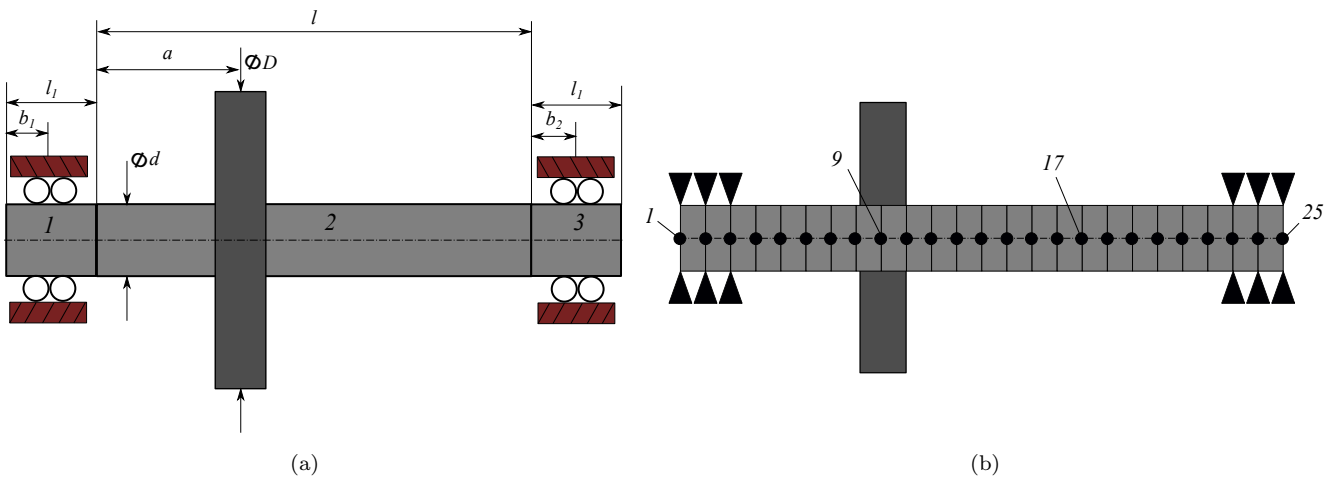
Uniform rotor: (a) CSM dimensions and (b) finite element mesh.
